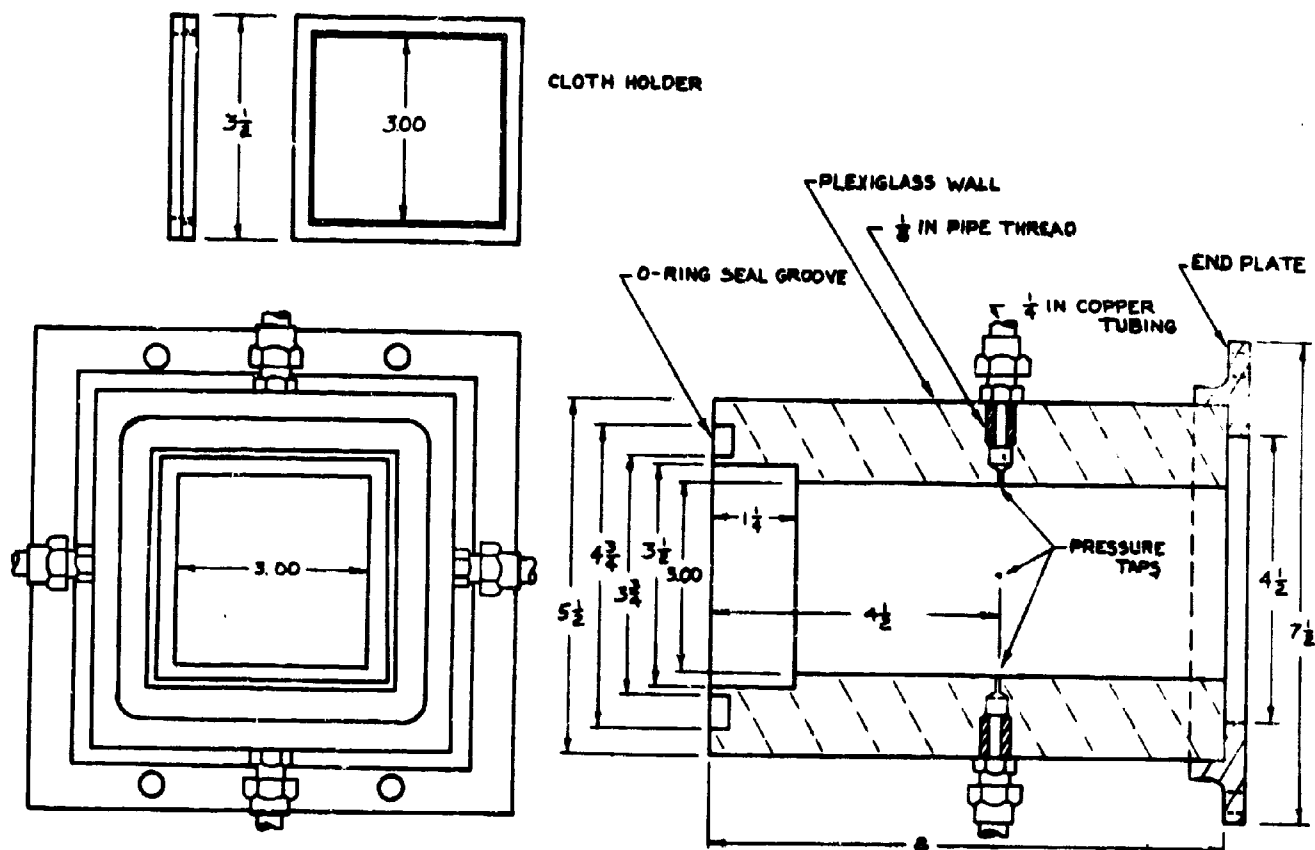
DETAIL LAYOUT OF TEST SECTION ( $\frac{1}{8}$  SCALE)
